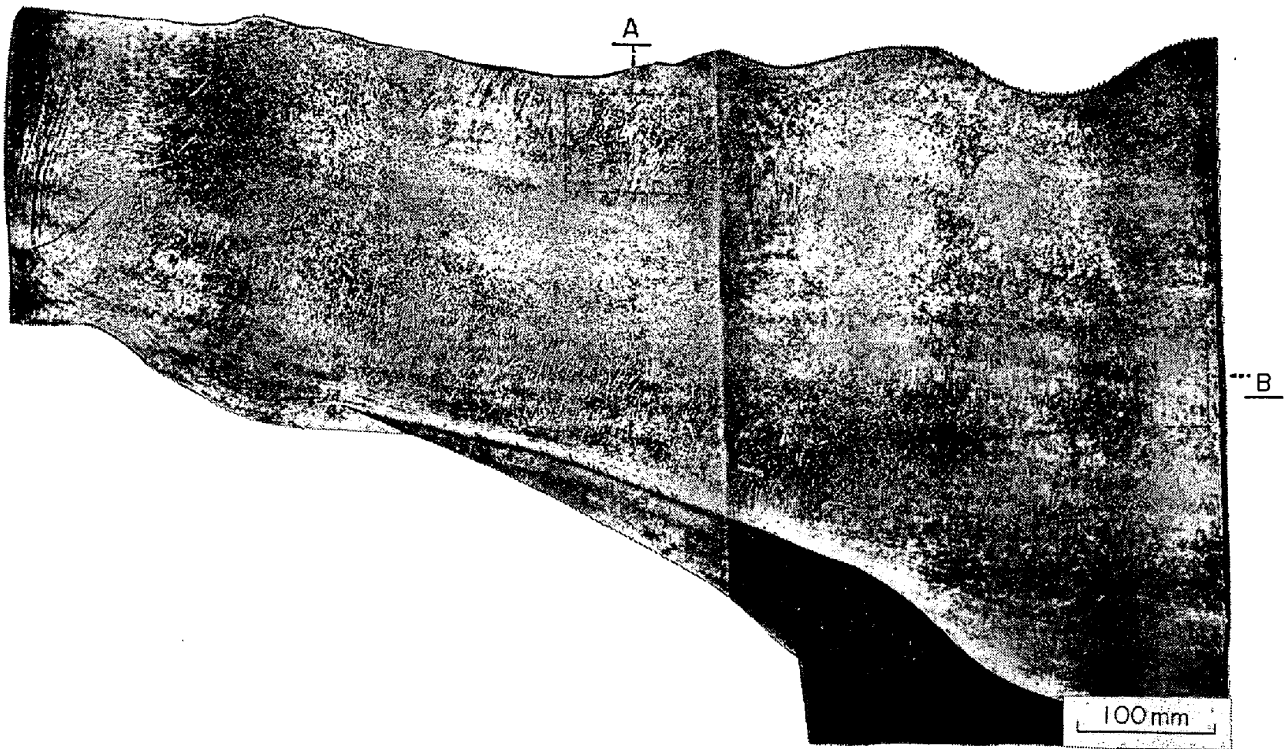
Macro-structure of the bottom part of 100 t ingot.
